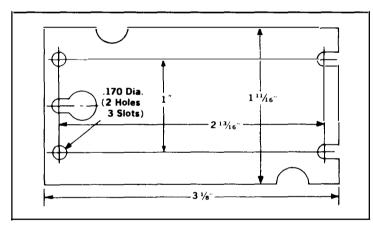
Outline and Dimension Drawings (dimensions in inches)
